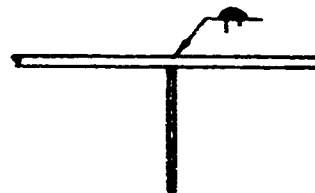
ARC-SEAM TEE WELD-JOINT DESIGN (REFS. 2, 53)
